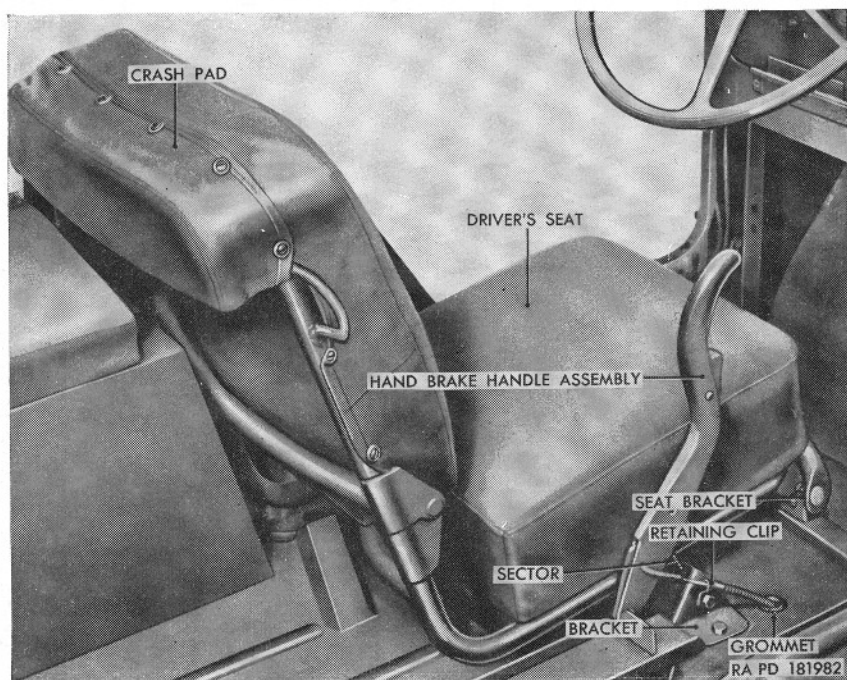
(Added) Hand Brake Handle and Driver's Seat Assemblies M170—Installed.
